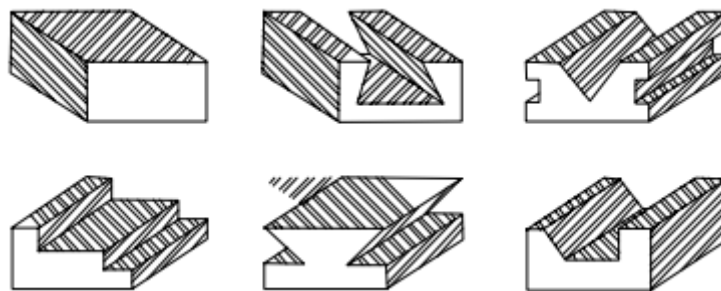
Shows Job Surfaces Generated by Milling Machine(wordpress.com).
